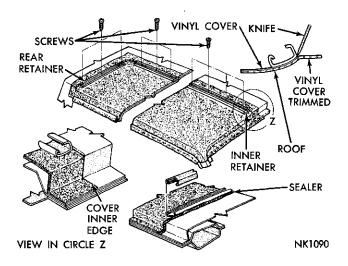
Installing Roof Moulding Retainers (Station Wagon)
